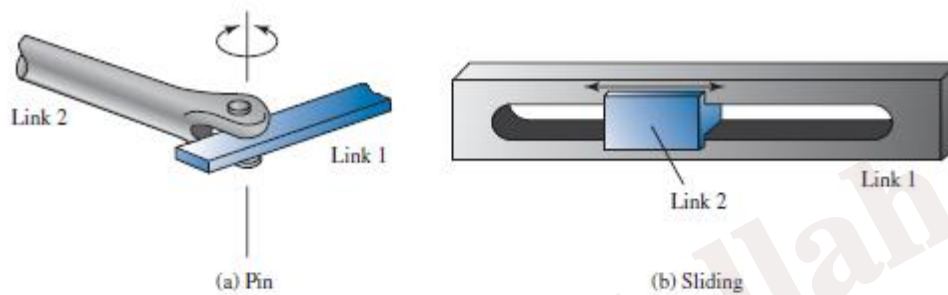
Primary joints (a) Pin and (b) Sliding
